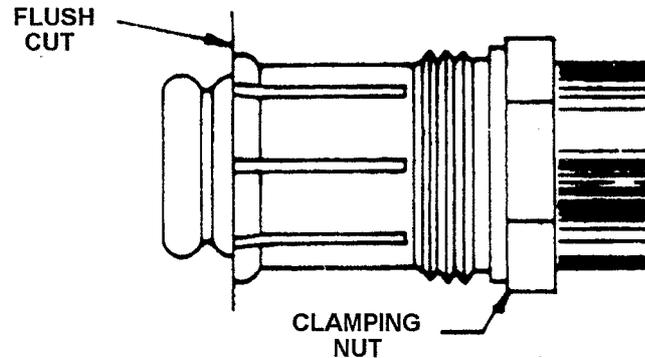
Adding the Clamping Nut and Cutting the Cable
